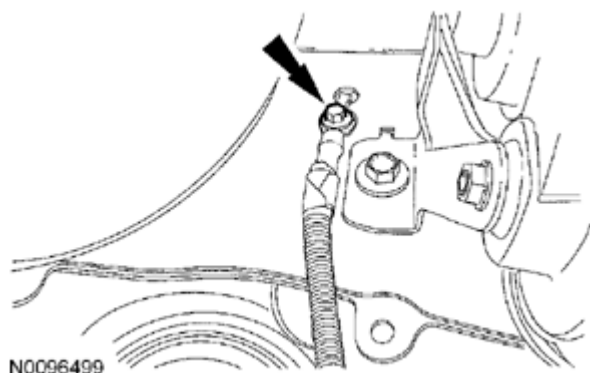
Locating Electronic Power Assist Steering Wiring Ground Wire Bolt
